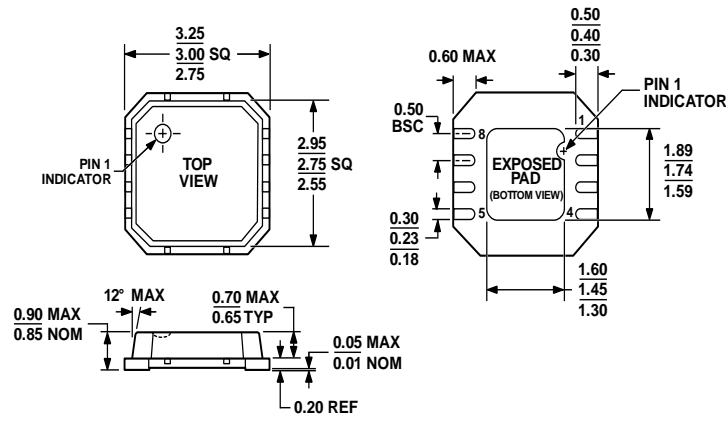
8-Lead Lead Frame Chip Scale Package [LFCSP\_VD]
